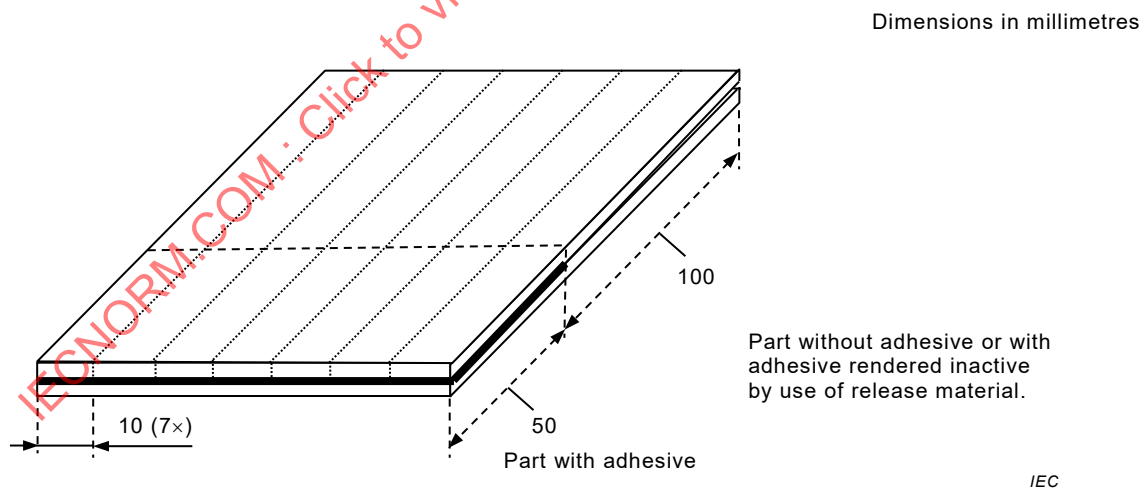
Example test panel (70 mm x 150 mm) and test specimen
